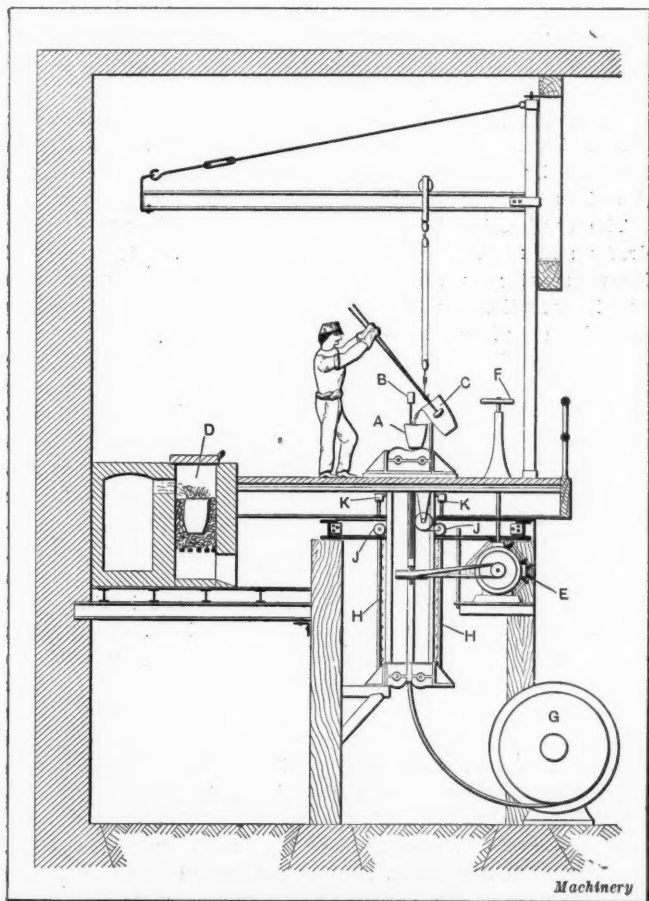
Diagram showing Arrangement of Casting Shop equipped with Mellen Rod Casting Machine
